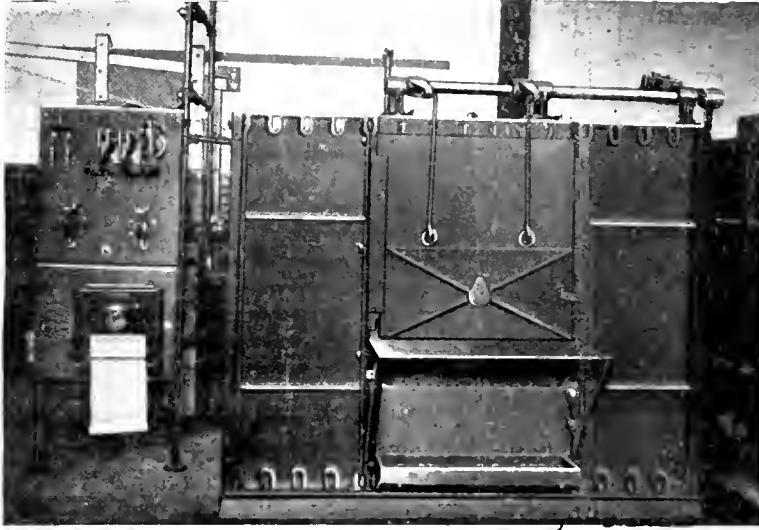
Box Type Electric Furnace and Control Panel Used for Hardening Punches, Dies and Cutters
